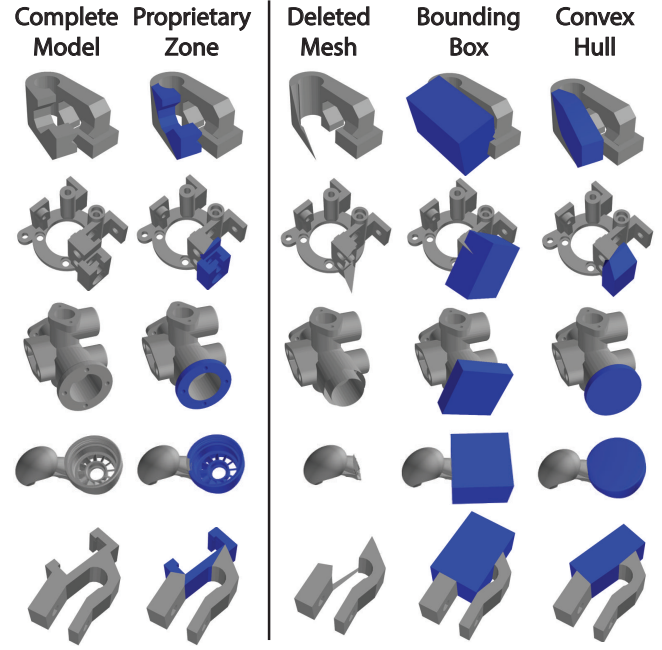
Illustration of the different methods for masking proprietary zones on five example parts: (top to bottom) a bar clamp, a gearbox, a pipe connector, a turbine housing, and an endstop holder. (Left to right) The original part geometry and the geometry with the proprietary zone highlighted. One method to mask parts is to delete the proprietary zone of the mesh, however this can lead to planned grasps in collision on the original object. Alternatively, the proprietary zone can be replaced with a its bounding box or convex hull.
